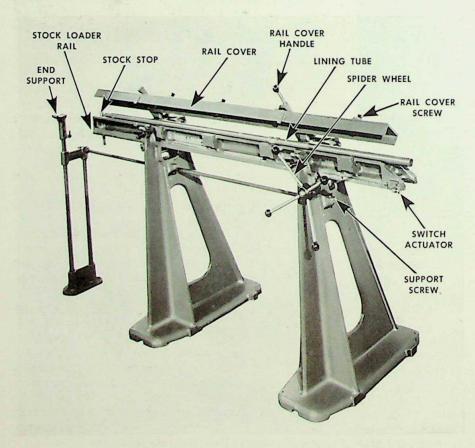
Stock Loader equipped with Lining Tube — Provides rigid support for stock with positive spindle alignment.
